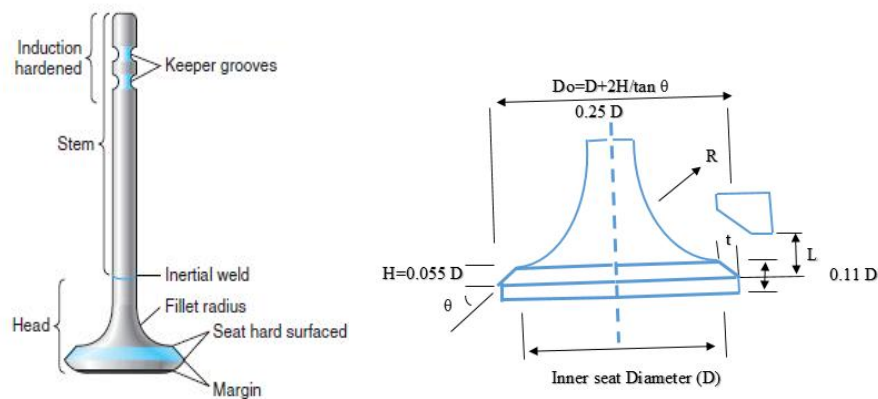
Shows most relevant dimensions for valve designing [34]
